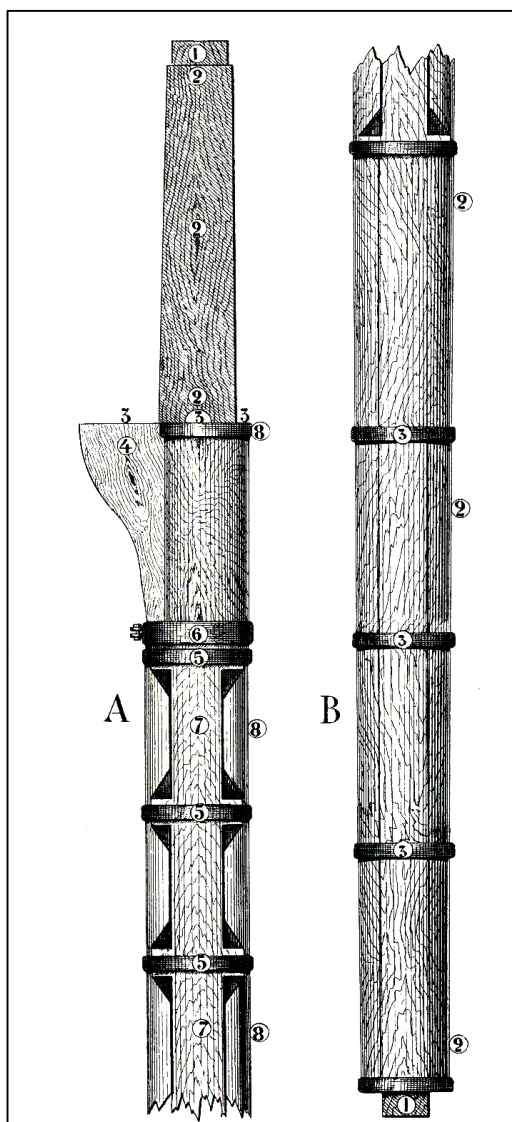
Diagram showing layout of the upper and lower parts of a wooden mast showing iron mast hoops (A5 and B3) and truss hoop (A6) (Paasch 1890).
